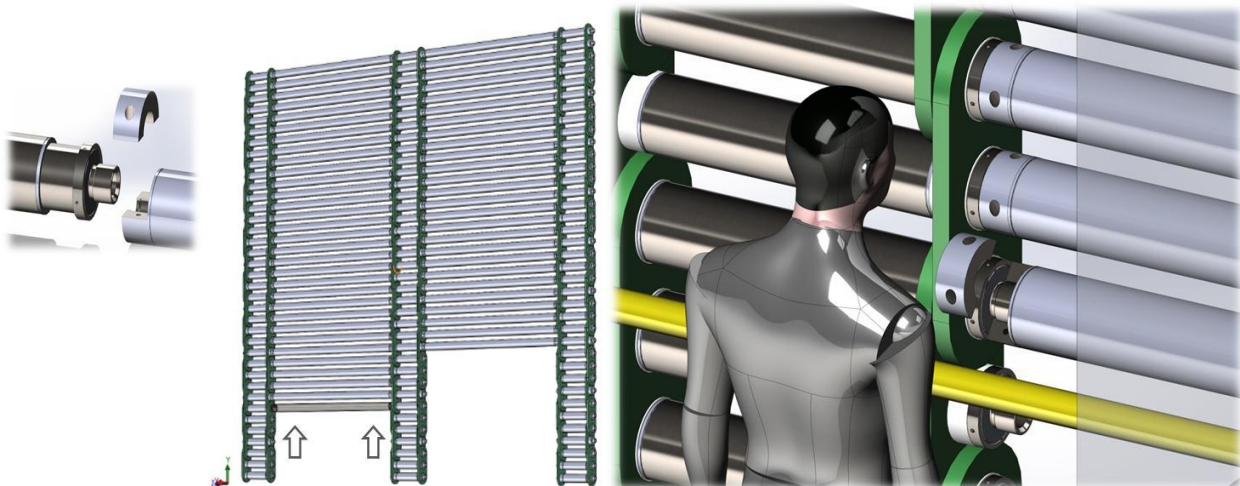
Installation of Straight Infill Field Shaping Coils. Courtesy Technodyne Ltd
